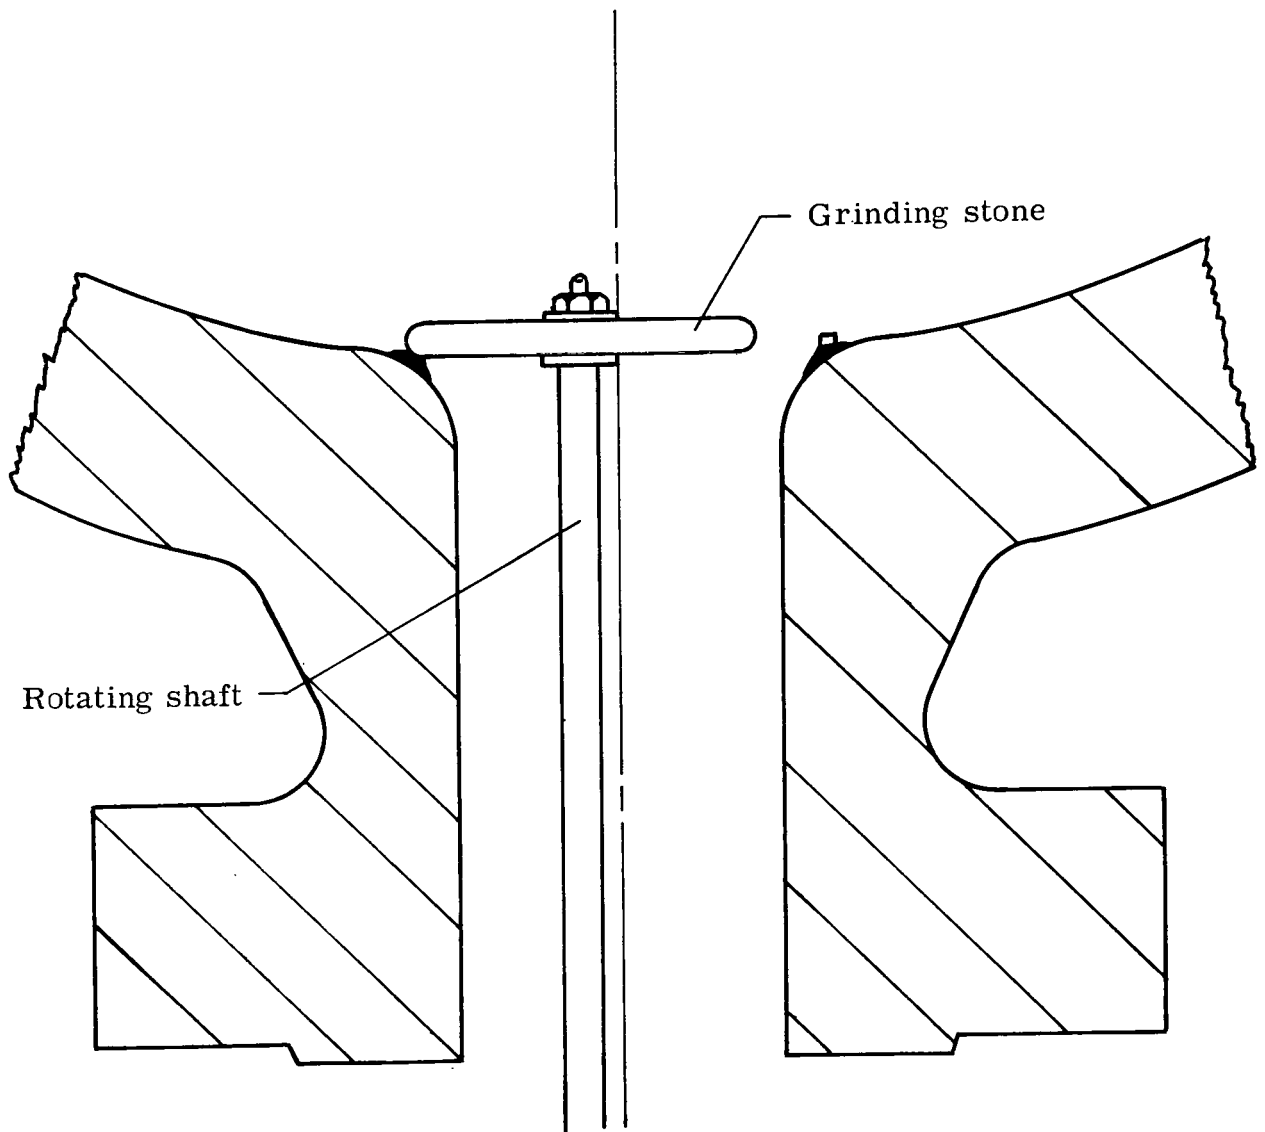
Cross-sectional view of air-storage-vessel nozzles with inside-corner radius being recontoured.
